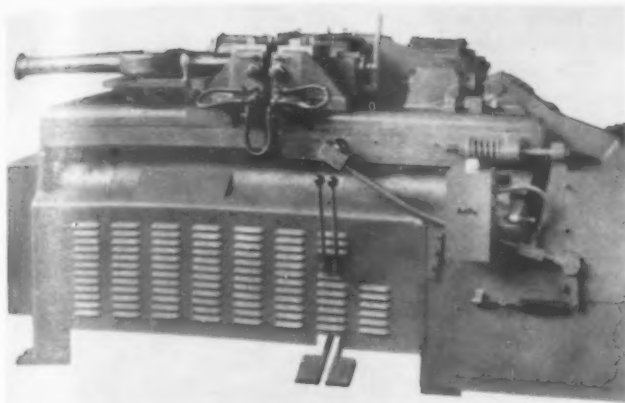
This motor-operated flash welder features air-operated horizontal clamping fixtures for welding flanged forgings to automotive rear axle housings. Platen flash and upset motion is imparted by a cam through a bell clamp or lever.
